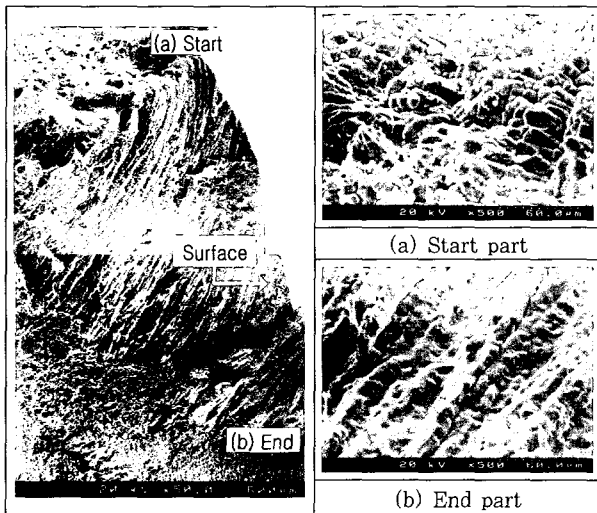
SEM fractographs of 7N01 in the hot cracking test
